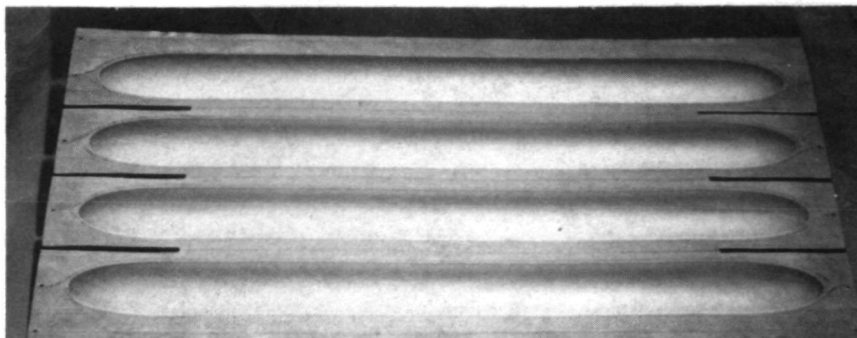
PANEL SUBASSEMBLY WITH SEAM WELDING COMPLETED
